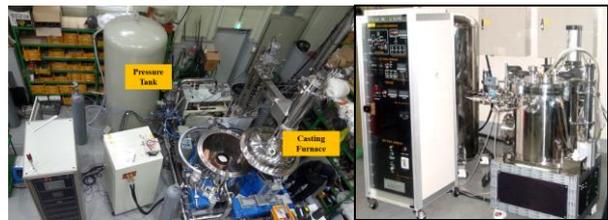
Engineering-scale injection casting equipment (left) and small scale injection casting equipment (right)
